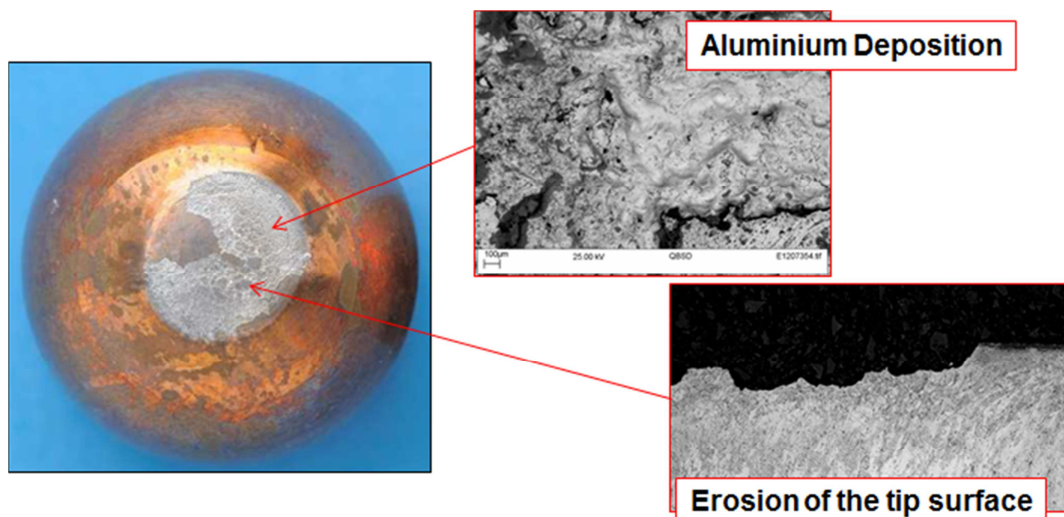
Degradation mechanisms of an electrode tip used to weld zinc coated steel
